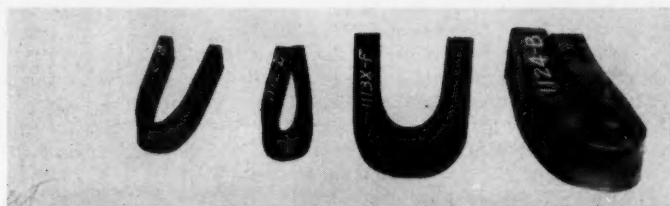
BEND TEST SPECIMENS MACHINED IN ACCORDANCE WITH WELDING ENGINEERING DEPARTMENT, GENERAL ELECTRIC CO. AND A.S.M.E. BOILER CODE SPECIFICATIONS.
